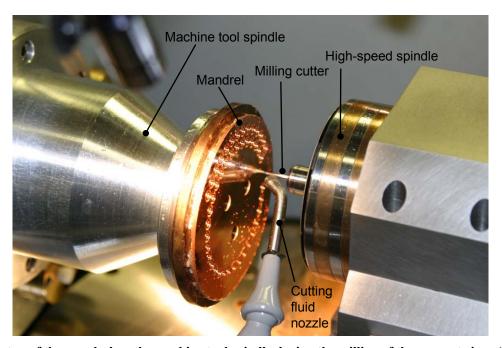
Setup of the mandrel on the machine tool spindle during the milling of the support rings (This picture was taken during a production run that produced over 100 precision support rings on the mandrel)
